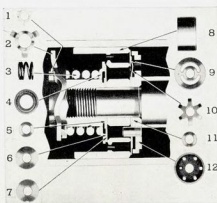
Rebound Valve Assembly 1 $\frac{3}{8}$ Inch Delco Shock Absorber
